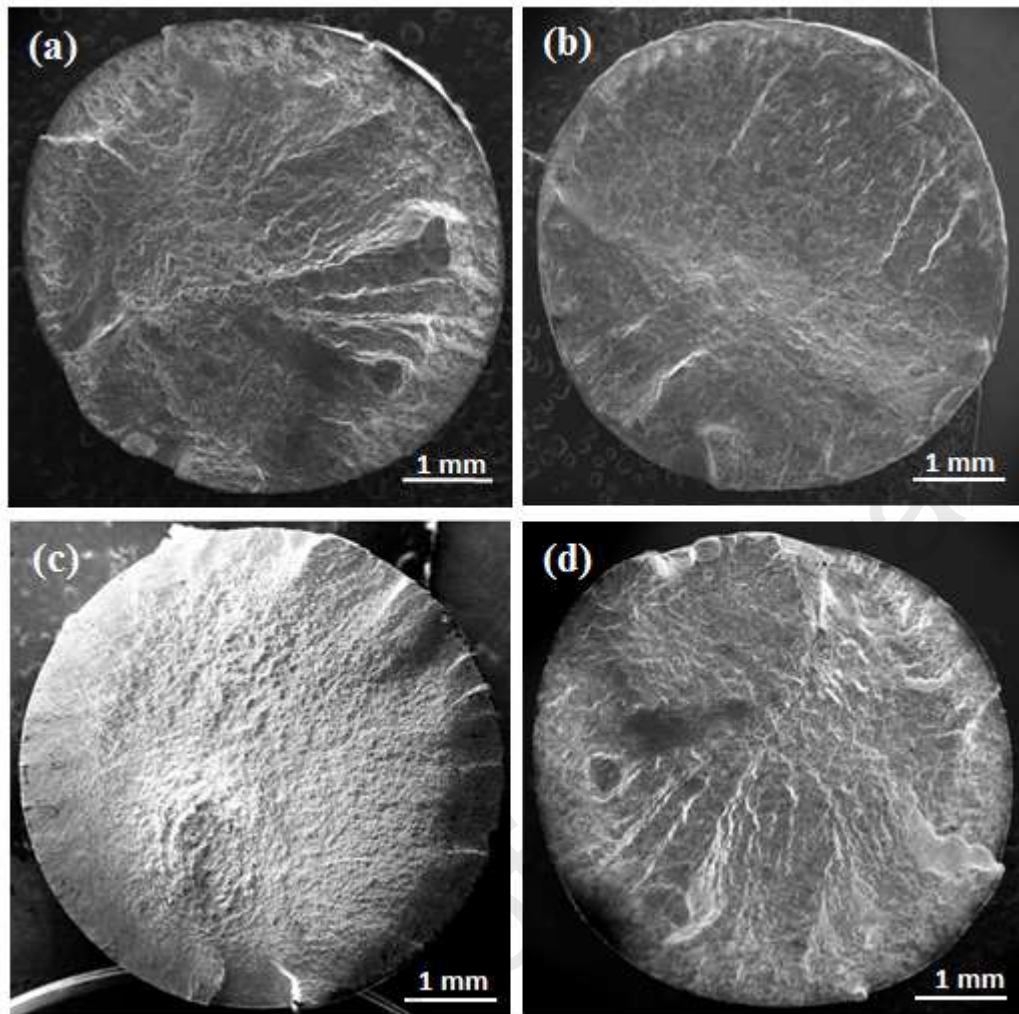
Fractures of samples after (a) ECAE (sample 3), (b) HT (sample 2), (c) ECAE+HT (sample 4), and (d) ECAE+HT+HA (sample 5) during the fretting fatigue test
